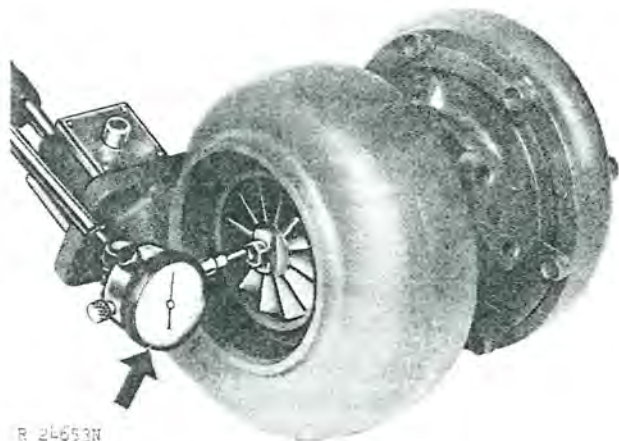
Dial Indicator Installed To Measure Axial End Play
